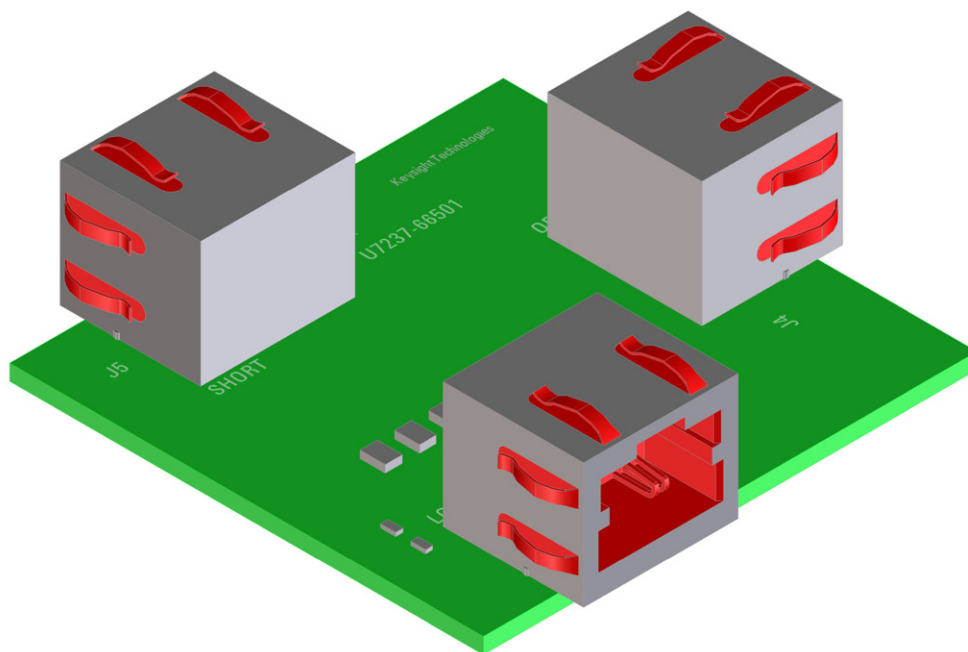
Section 3 of the U7237A 10GBase-T Transmitter Test Fixture
